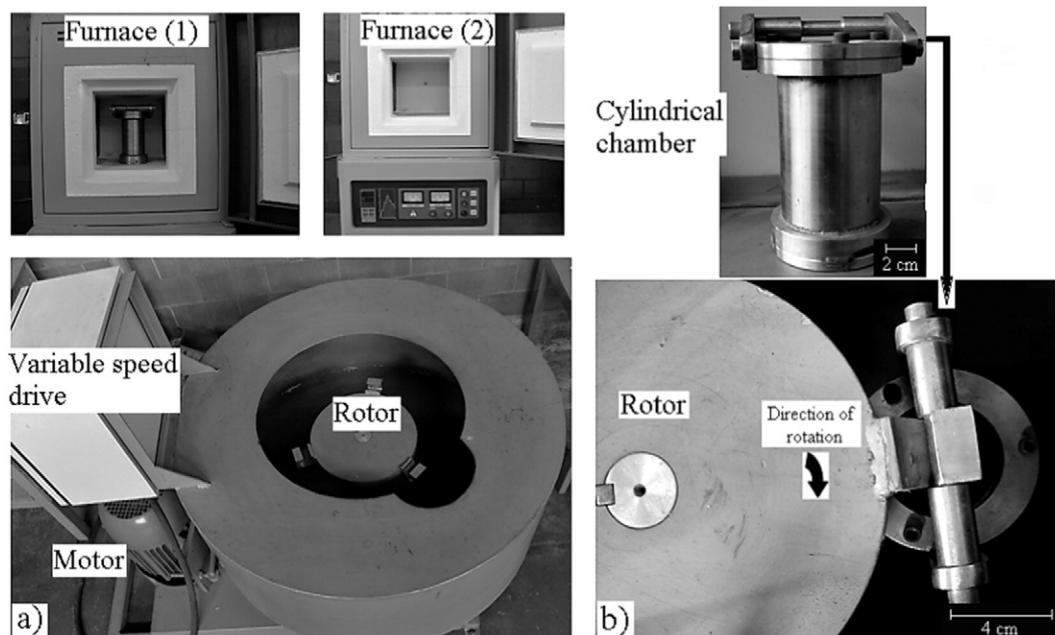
a) Centrifugal infiltration equipment b) cylindrical steel chamber used for the infiltration process (upper part) and its position in the rotor of the centrifuge (lower part).
